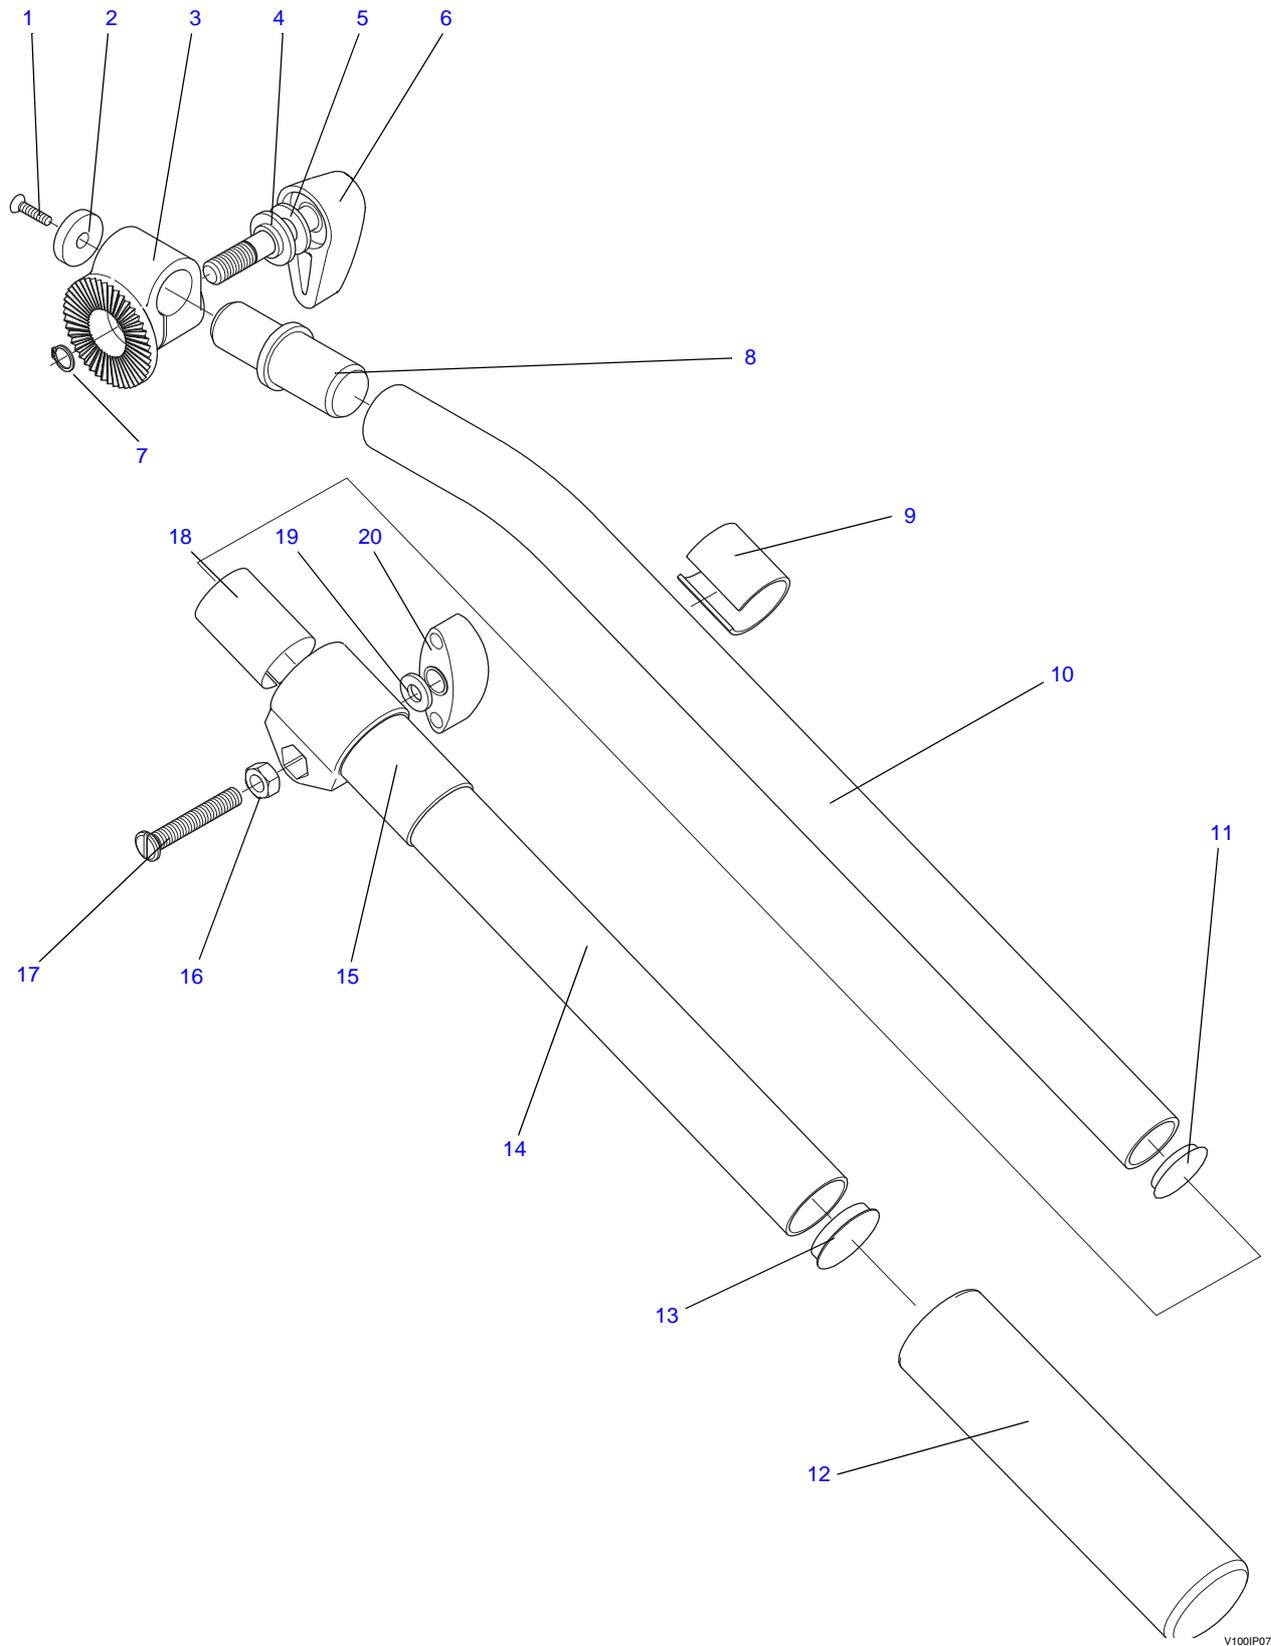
Vision 100 Pan and Tilt Head - Pan Bar
